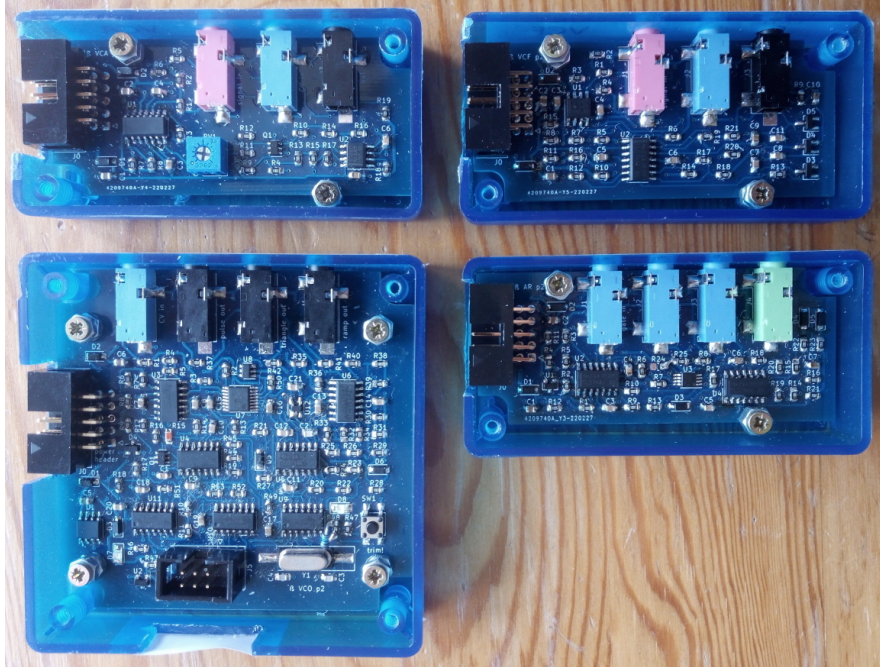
Photo of all enclosed modules with their lids removed. Clockwise from top right: VCF, AR EG, VCO, VCA. For PCB mounting, I used 2.5x10 mm self-tapping screws with two M3 nuts used as standoff due to problems with sourcing smaller and shorter screws.
